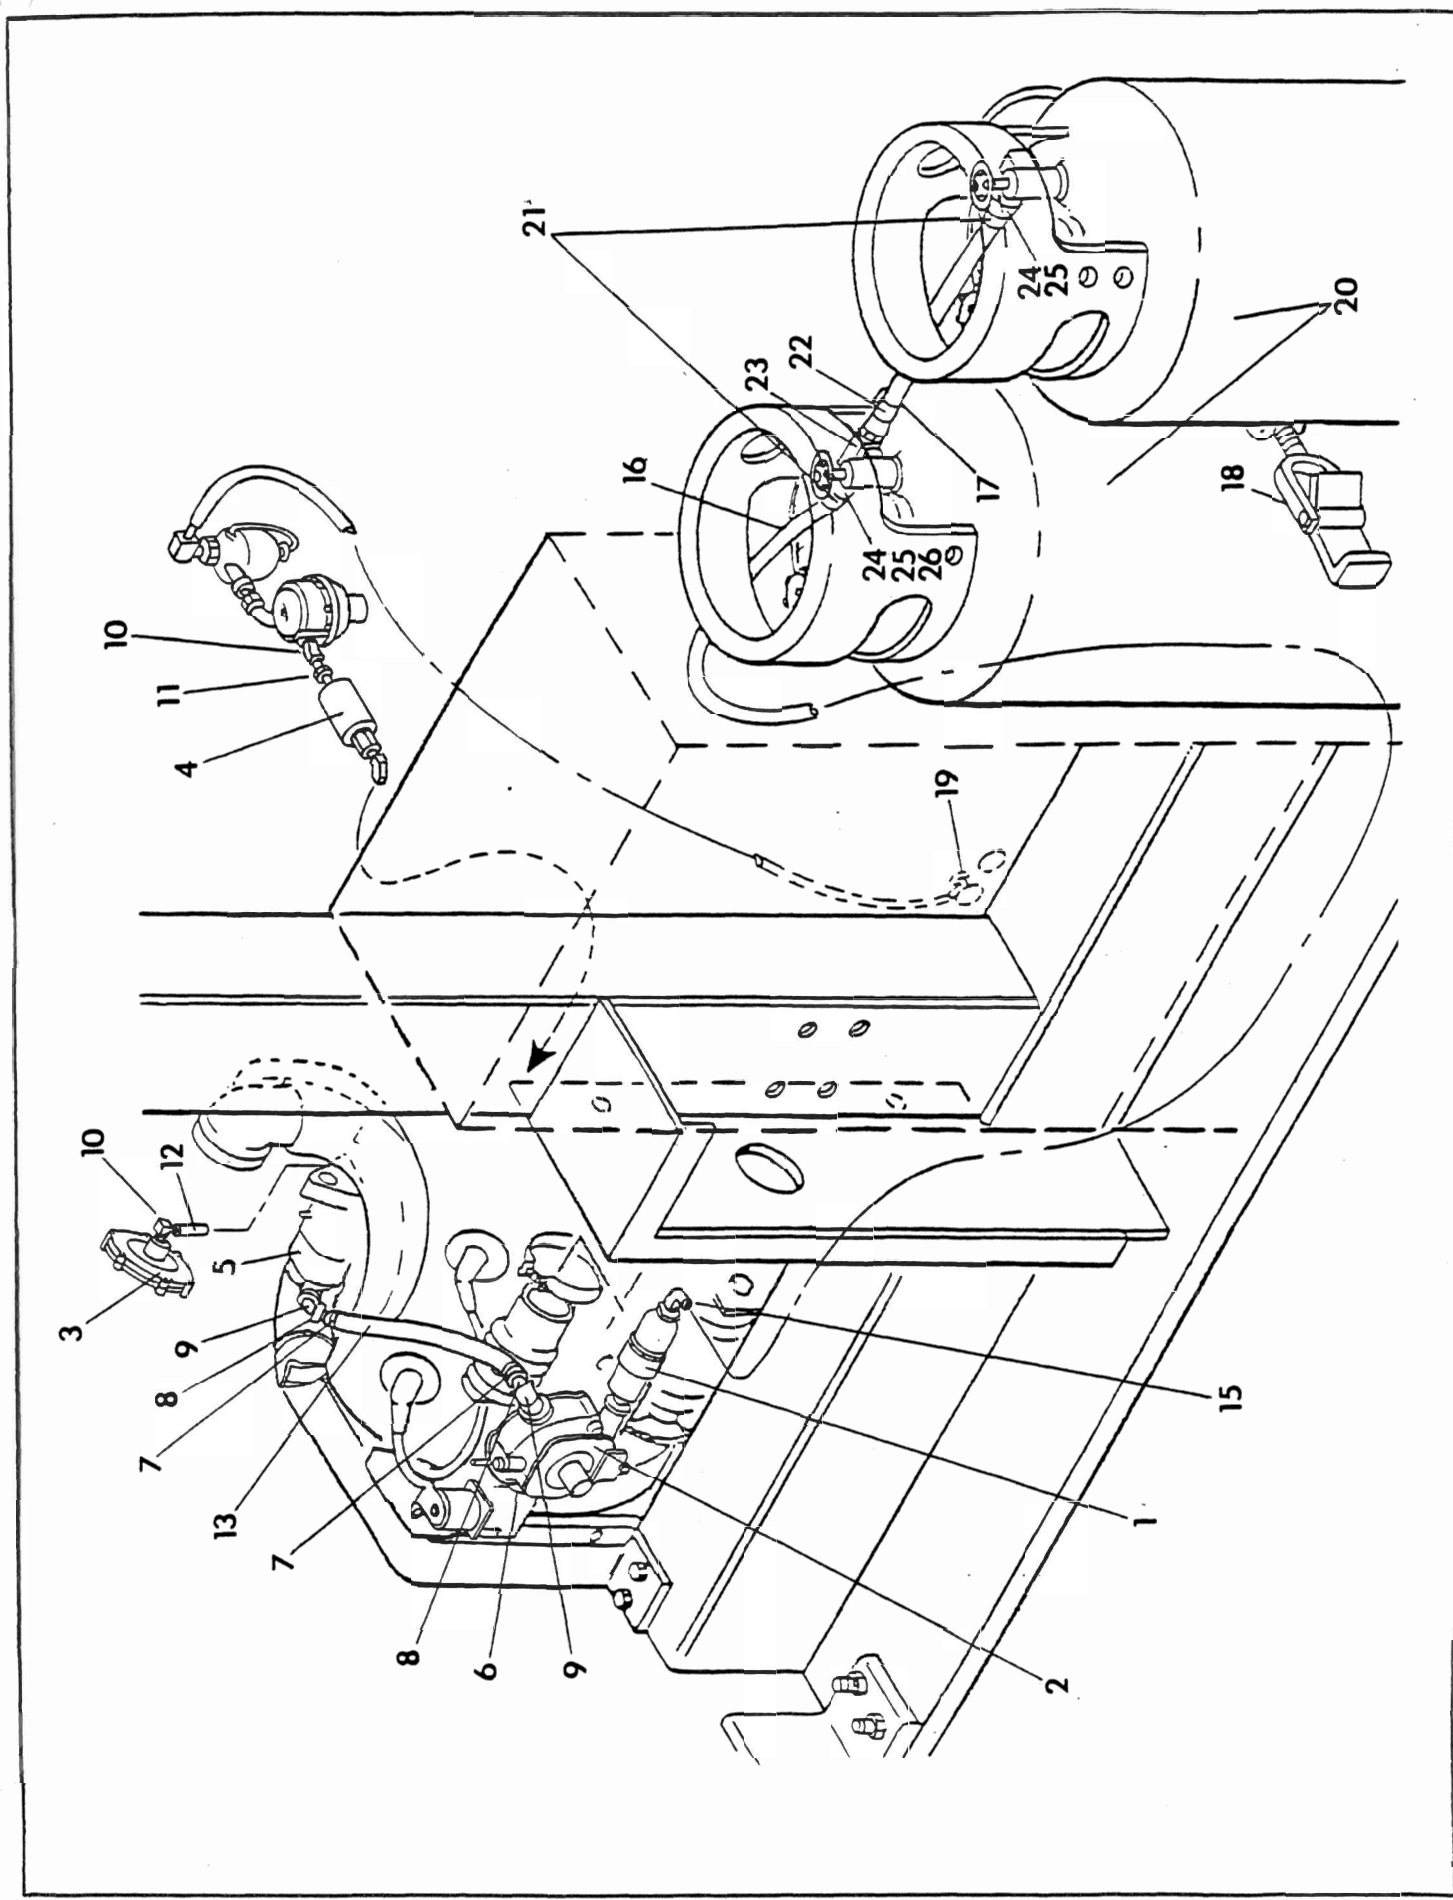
AUXILIARY HYDRAULIC POWER PACK INSTALLATION (OPTION 21648 &amp; 21650)
